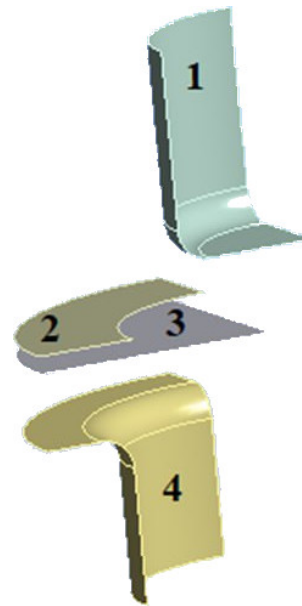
Numerical modelling of stamping-drawing: 1 – Punch, 2 – blank holder, 3 – blank, 4 – draw cavity.
